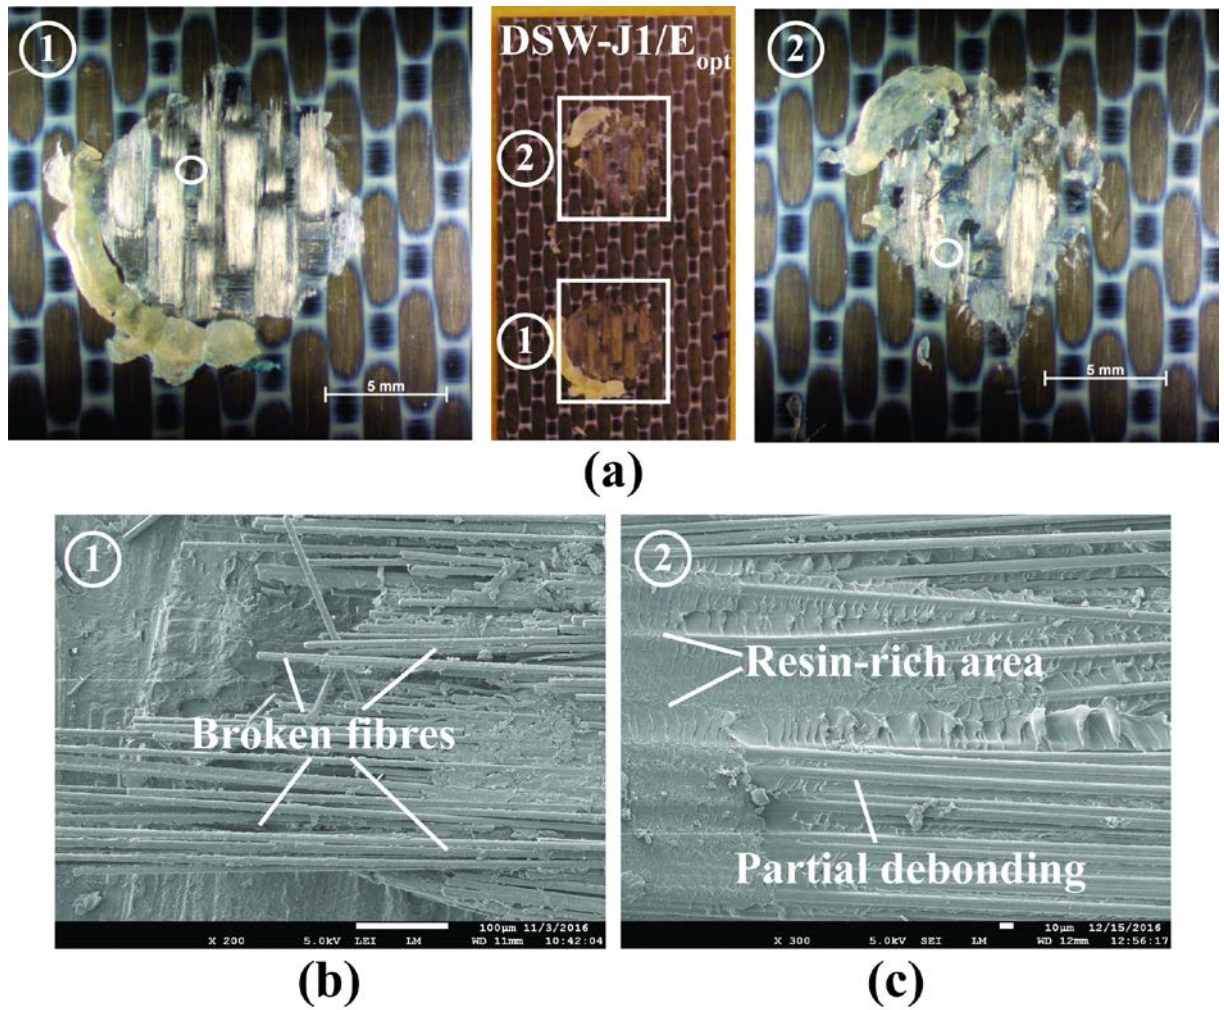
(a) Representative fracture surfaces of the DSW-J1/E_{opt} joints. The numbers indicate the welding sequence (Fig. 5). SEM micrographs (b) and (c) show the details of the areas circled in the fracture surfaces of Weld 1 and Weld 2, respectively. The scale bars are 5 mm (for stereo microscopy) and 10 μm (for SEM).
